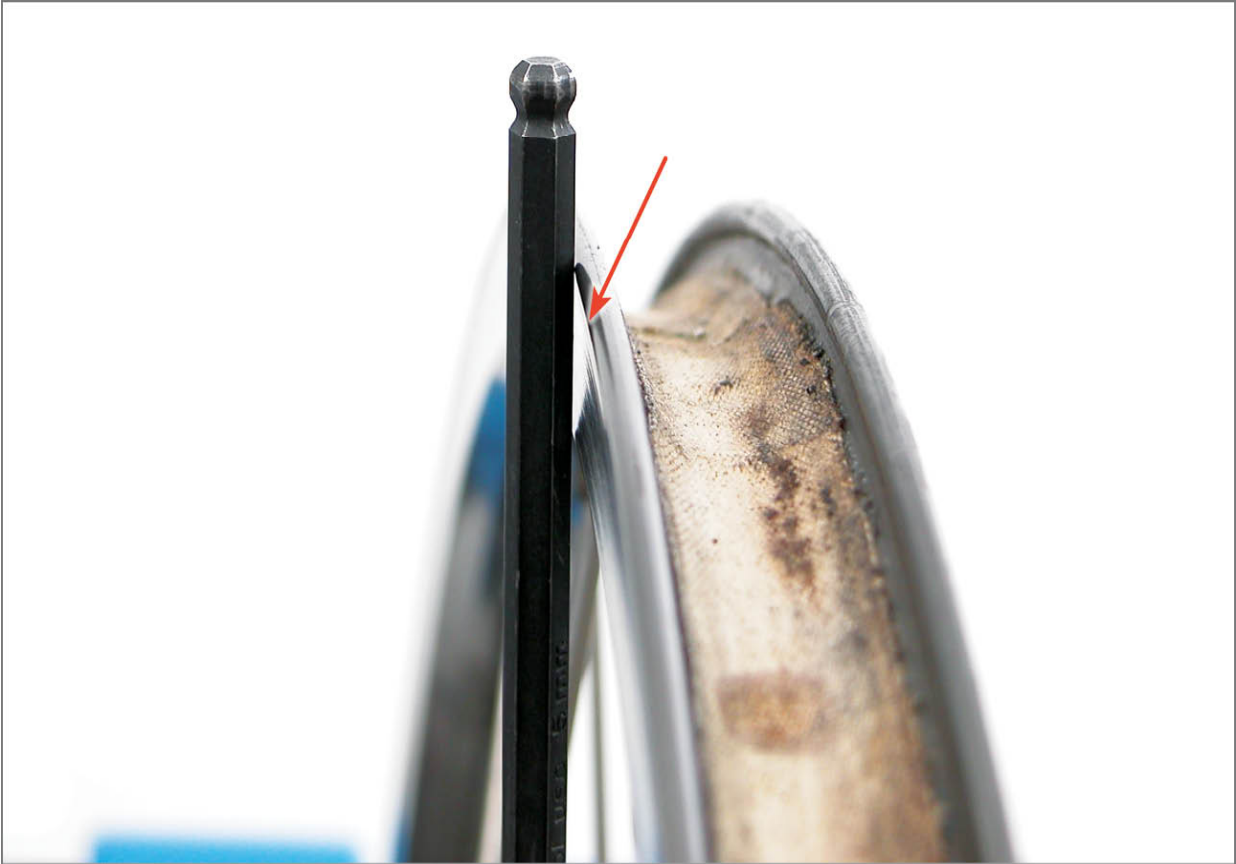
Rim braking surface worn beyond safe tolerances
